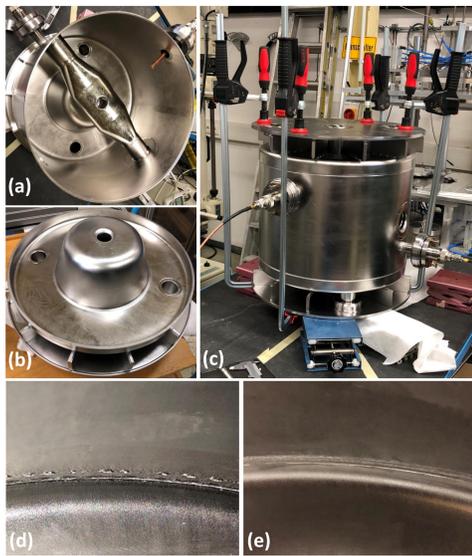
Open SSR (a) before attachment of trimmed end cap (b). Temporarily assembled cavity for RF tuning (c). Weld spatter on RF surface after virtual welding (d) and surface improvement after polishing/grinding (e).
